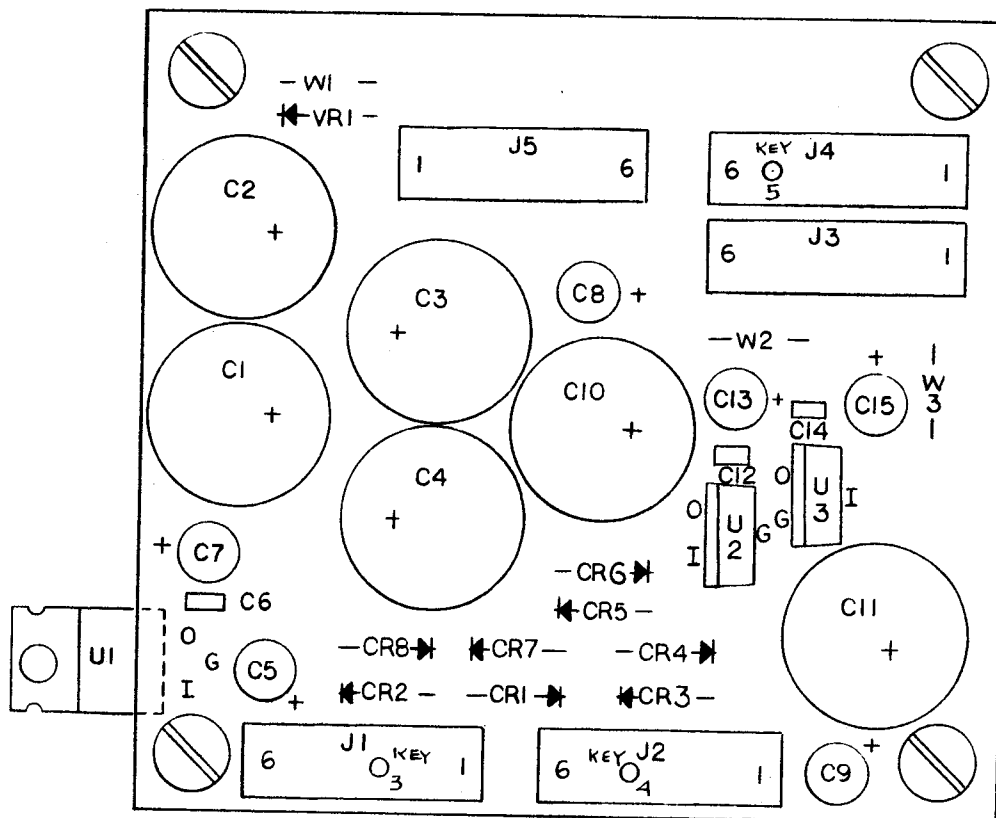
ASSEMBLY DRAWING - DC POWER SUPPLY
